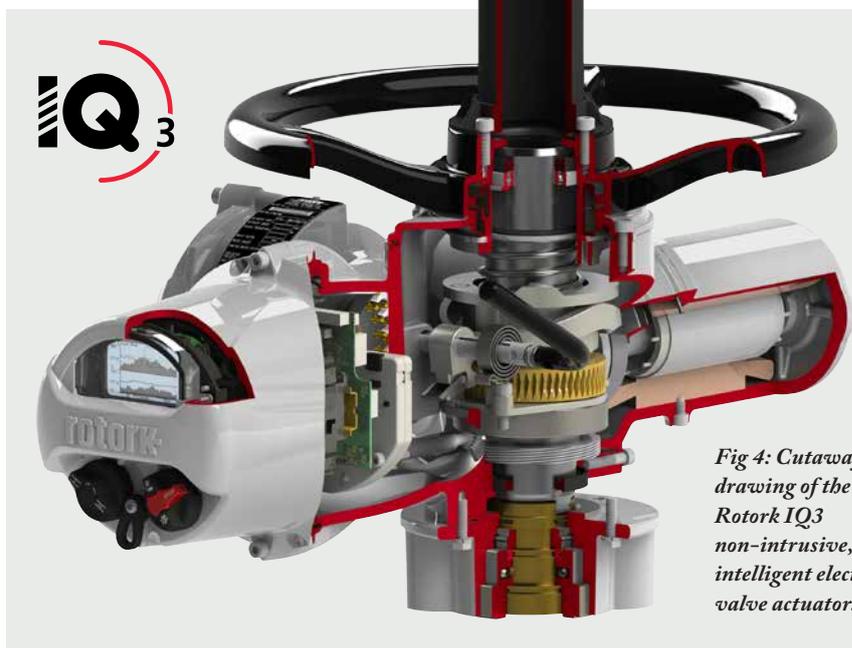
Cutaway drawing of the Rotork IQ3 non-intrusive, intelligent electric valve actuator.
